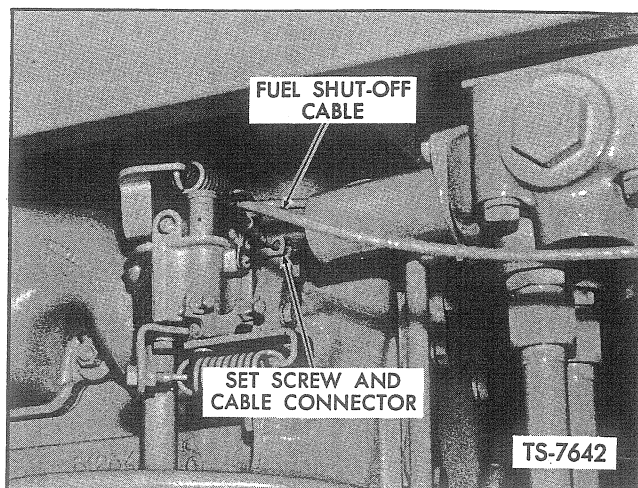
Adjust Engine Fuel Shut-Off Control — G.M. Diesel
